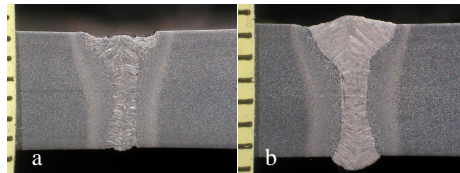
Laser-GMA hybrid welded joint, filler material: OK 12.51.
